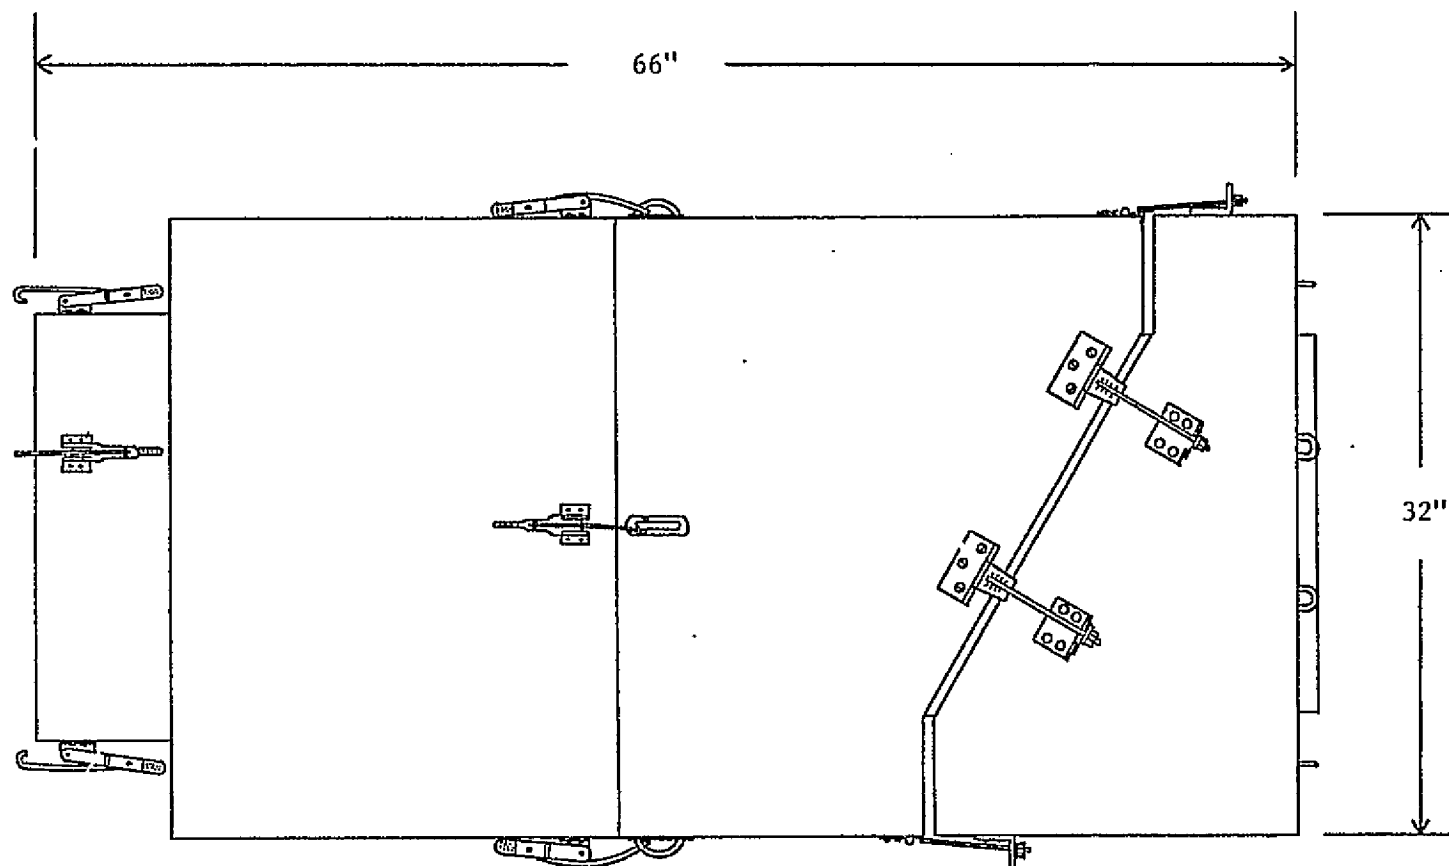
Clamping System of the Special Test Sections (Top View)
